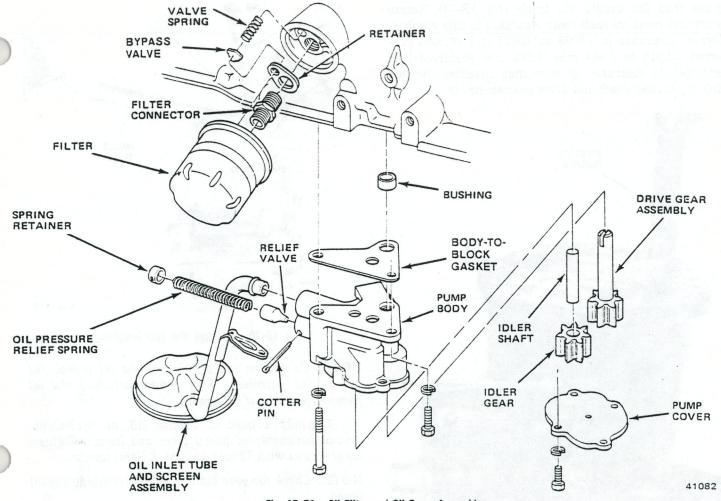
B-71 Oil Filter and Oil Pump Assembly
